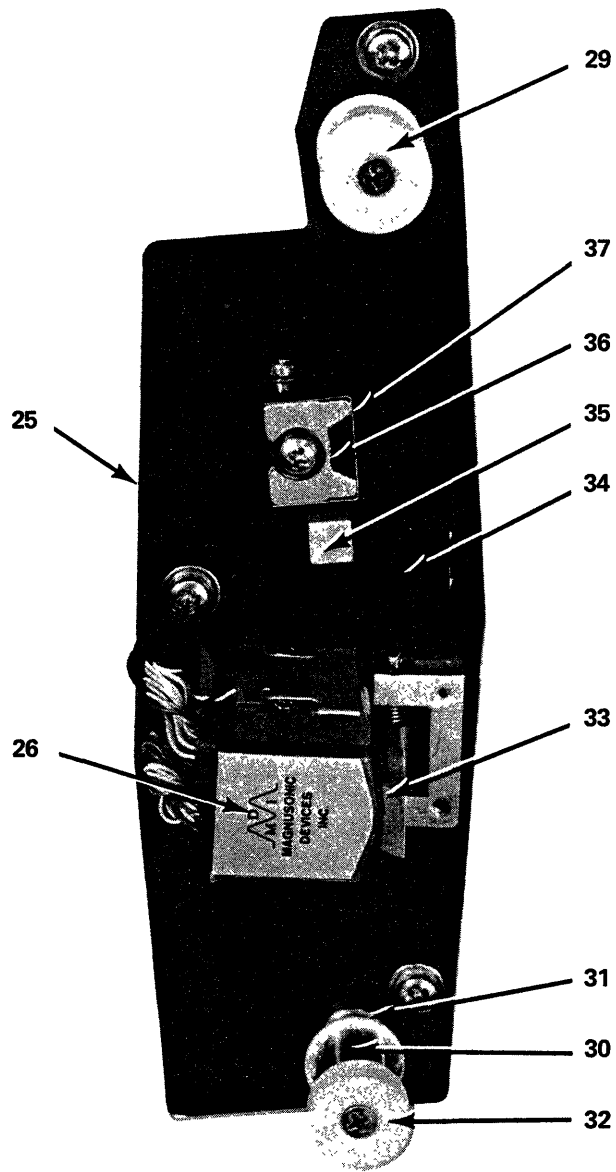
Headplate Assembly (9020049-01) Parts Location
